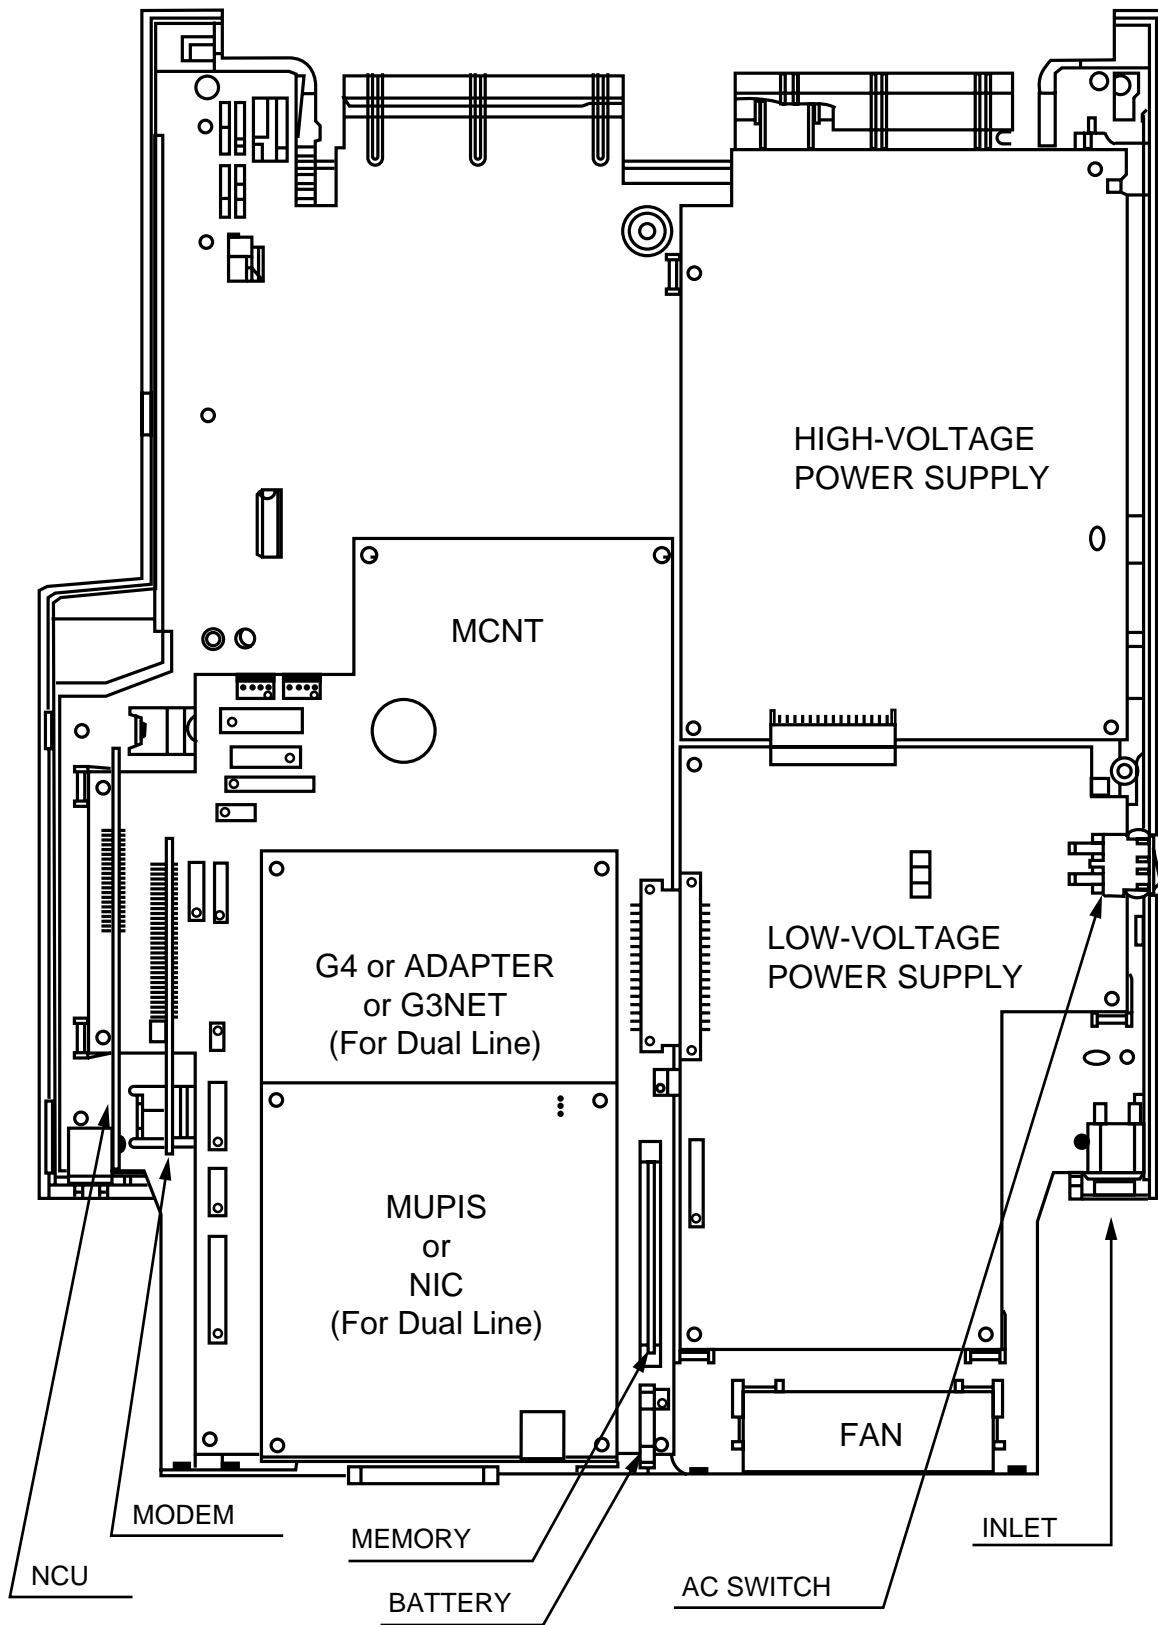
Overall Dimension and Mechanical Structure 2/2
